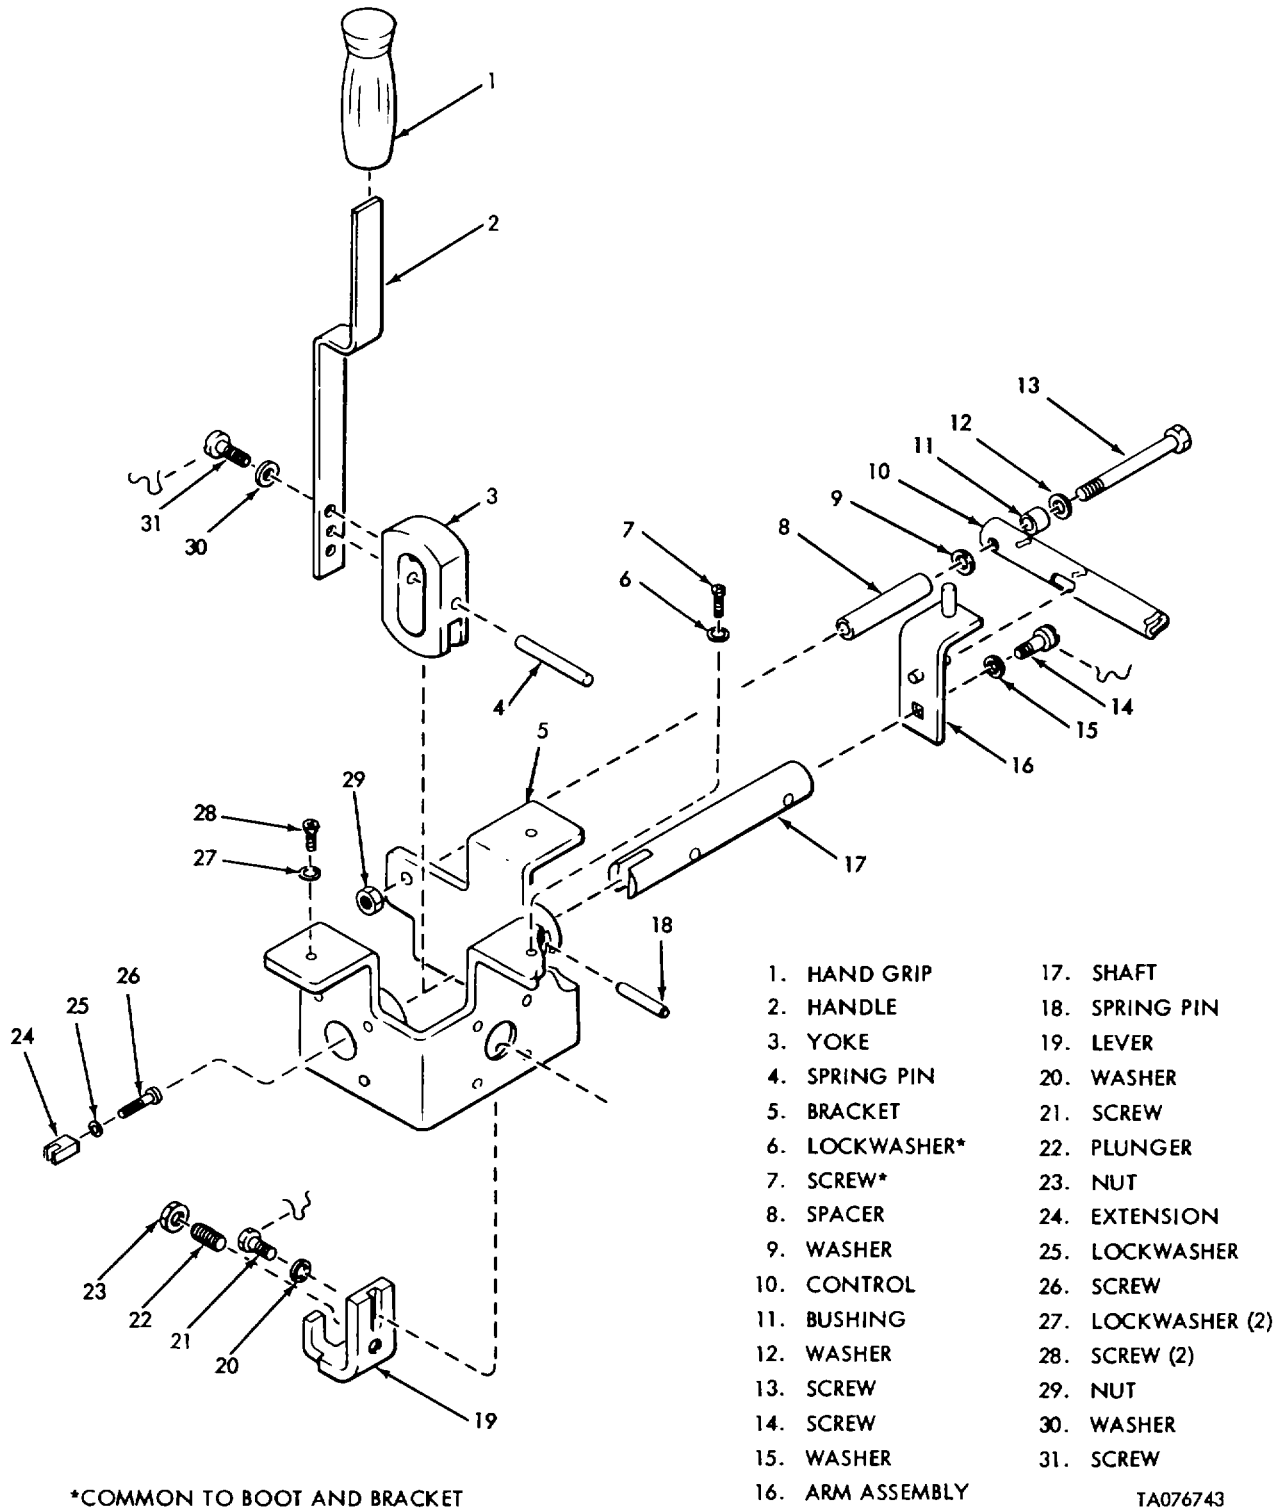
Hydraulic Control Console - Control Linkage Removal
